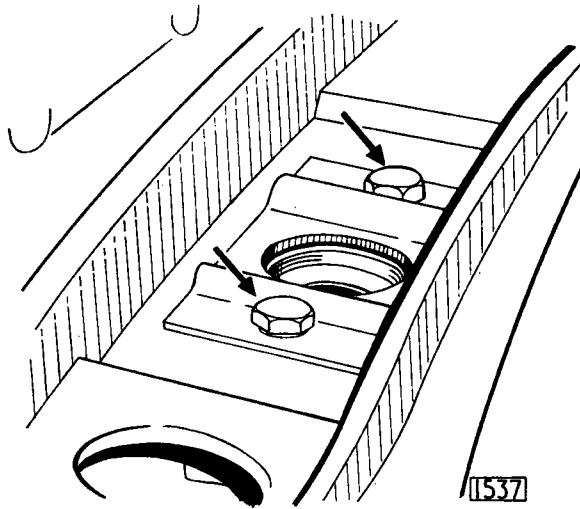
Showing the two setscrews which secure the bonnet catch striker plate.
